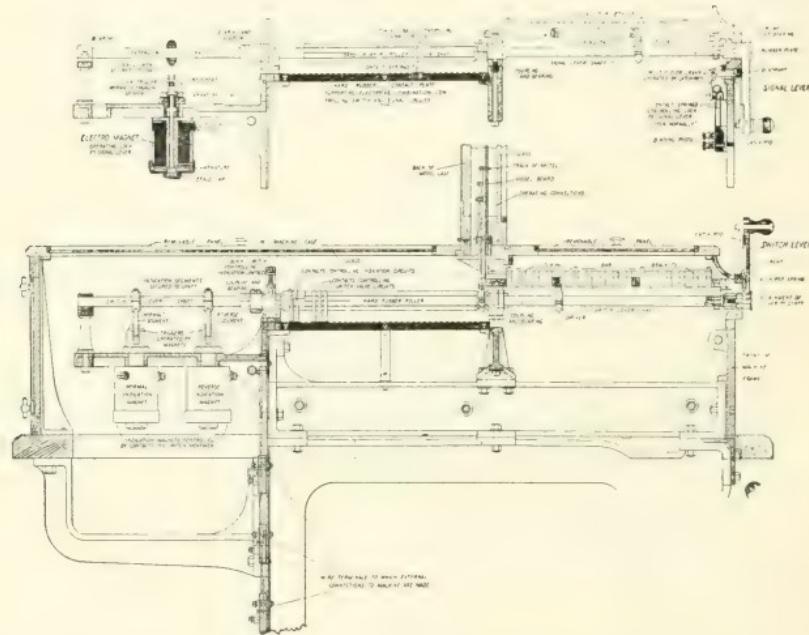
SECTIONAL VIEW OF ELECTRO-PNEUMATIC INTERLOCKING MACHINE
